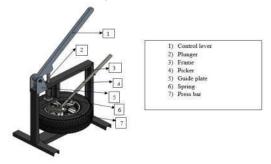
Tyre Bead Breaking, Removal and Insertion Device
